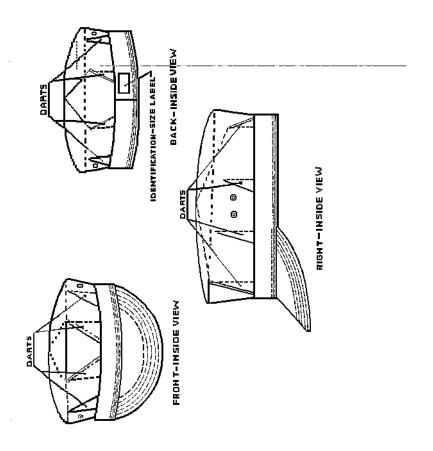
CAP, UTILITY, CAMOUFLAGE
